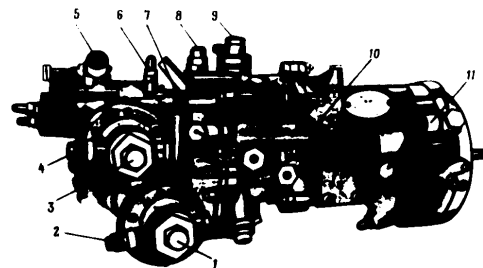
HP-10 A Unit, View of Acceleration Control Unit and Starting Control Unit Adjusting Elements
